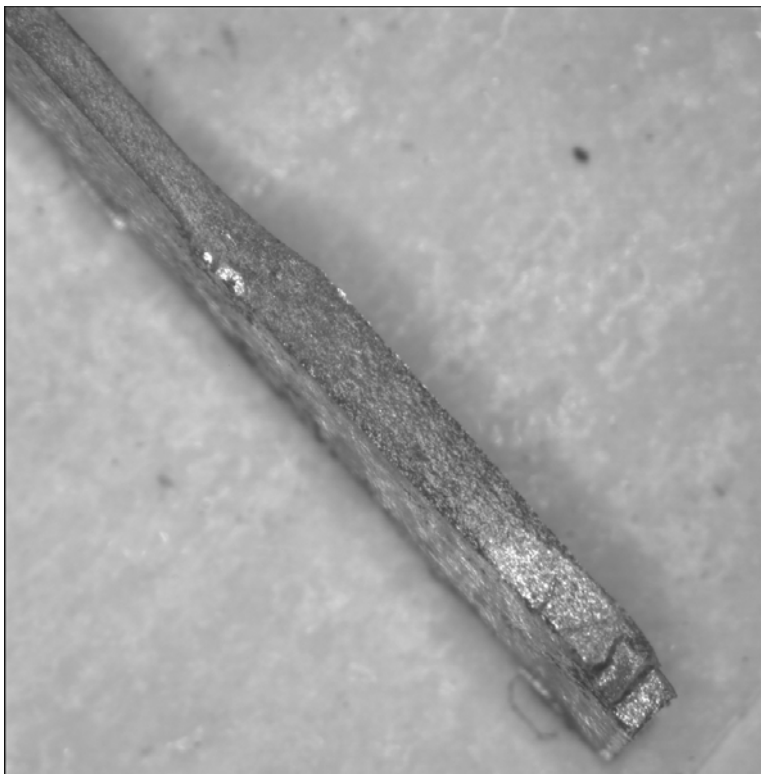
Fracture Surface of Specimen 5934.
